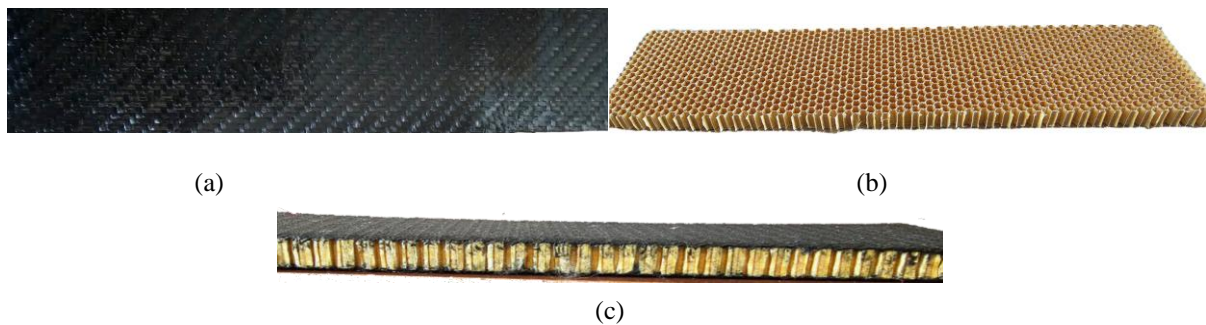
The investigated sandwich structure's components (a) face sheet, (b) honeycomb core, (c) assembled final structure
